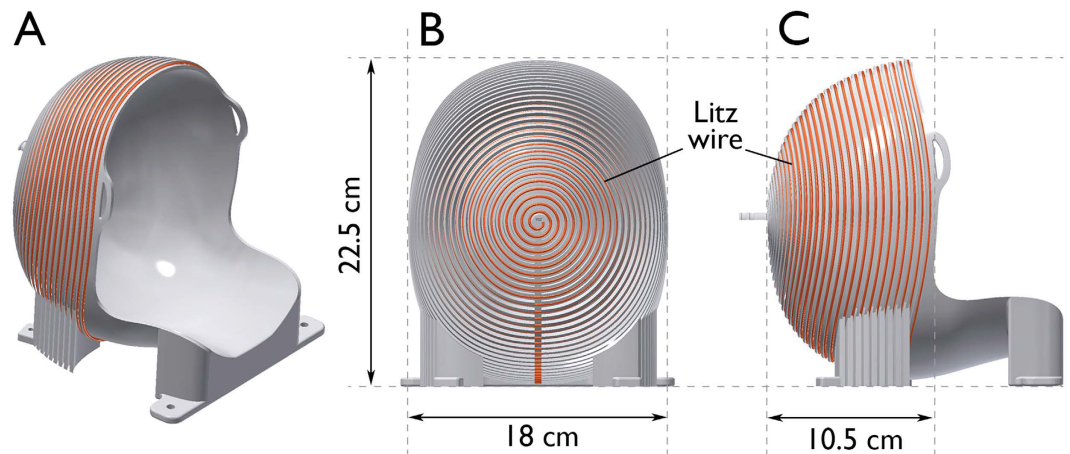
3D renderings of the single channel form-fitting head coil. (A) isometric, (B) back, and (C) side views are shown. The final design was 3D printed on a Fortus 360 mc printer (Stratasys, Eden Prairie, MN, USA) in polycarbonate using fused deposition modeling technology. The 30-turn spiral was wound with Type 1 40/38 Litz wire, parallel resonated to 276 kHz, and capacitively matched to 50 ohms.
